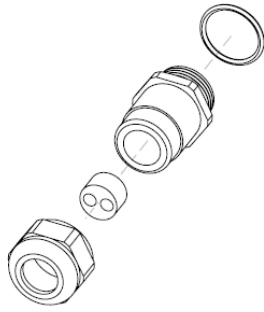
The XT-1 M20 cable gland with insert for 2 cables
